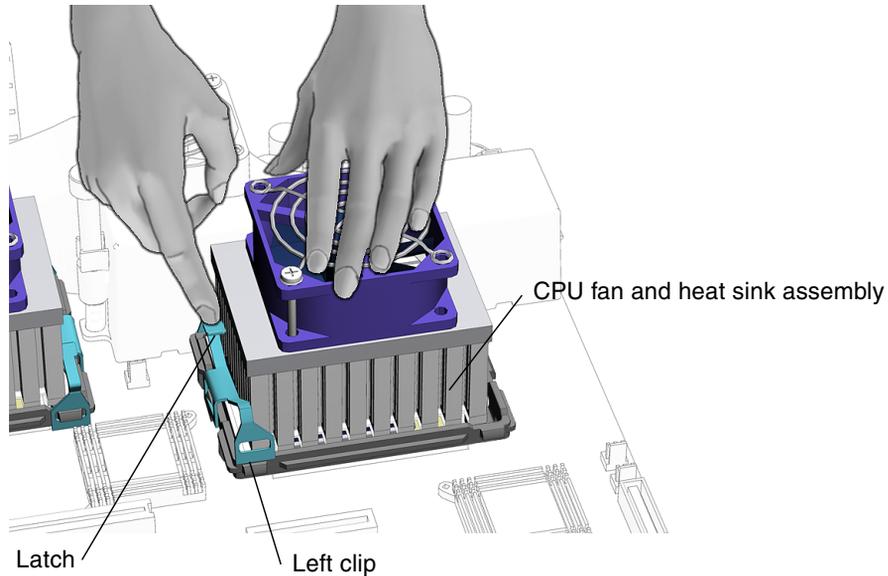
Holding the CPU Fan and Heat Sink Assembly
